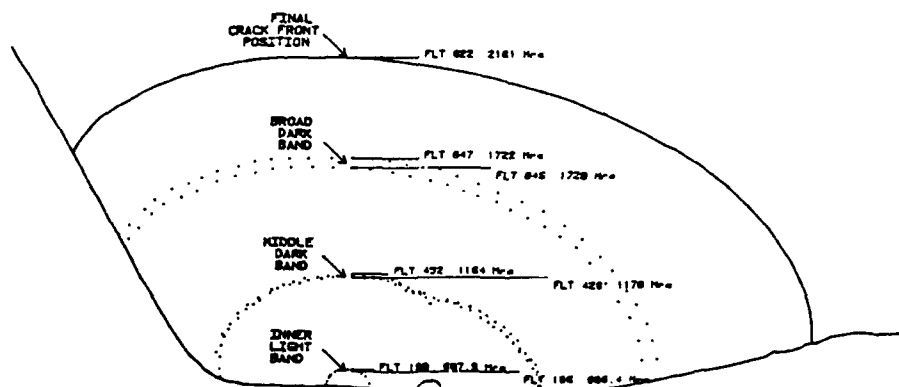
D6ac STEEL WING PIVOT FITTINGS OF F-111 AIRCRAFT - UPPER AND LOWER SURFACES
